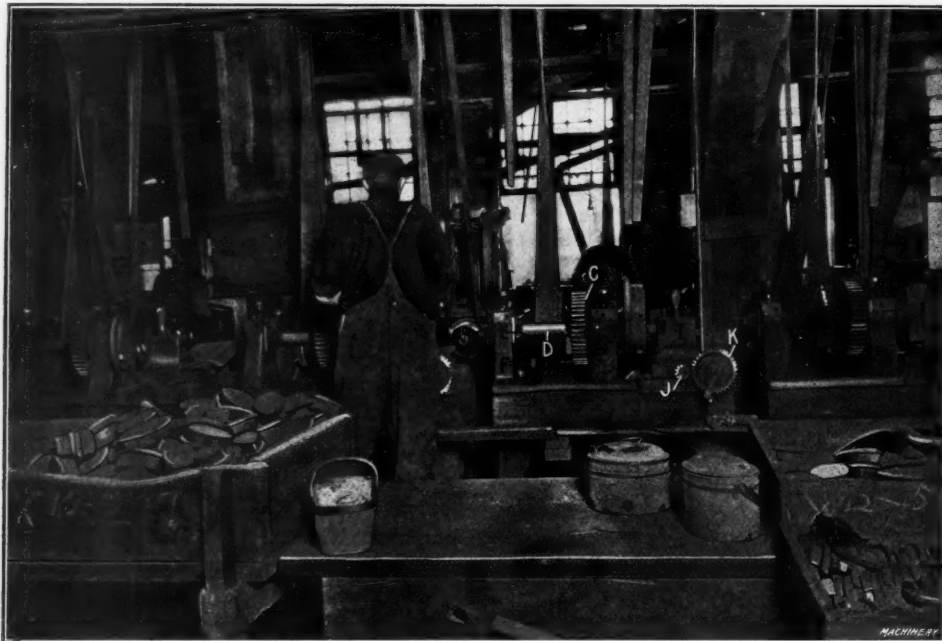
"Old Lathes" formerly used for machining Sad Iron Bases
